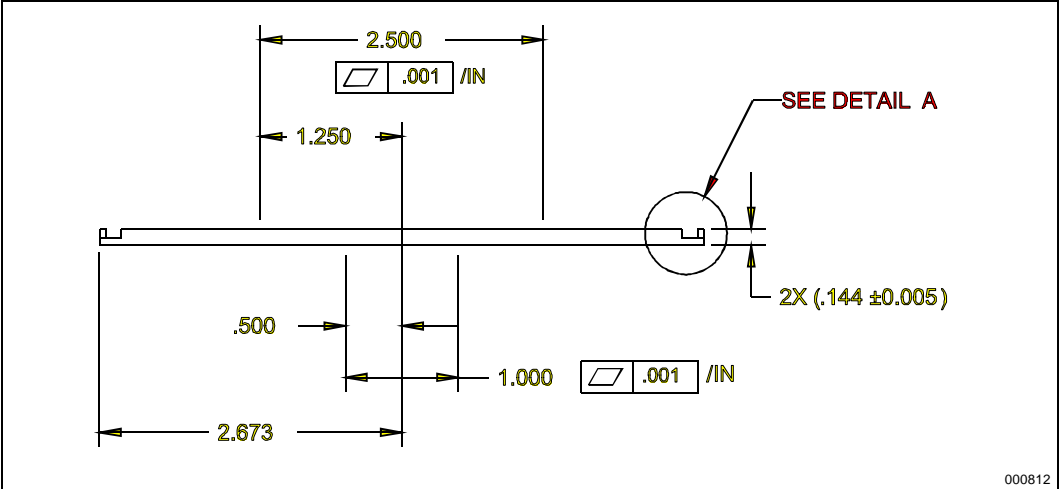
Thermal Plate Mechanical Dimensions (2 of 2)
